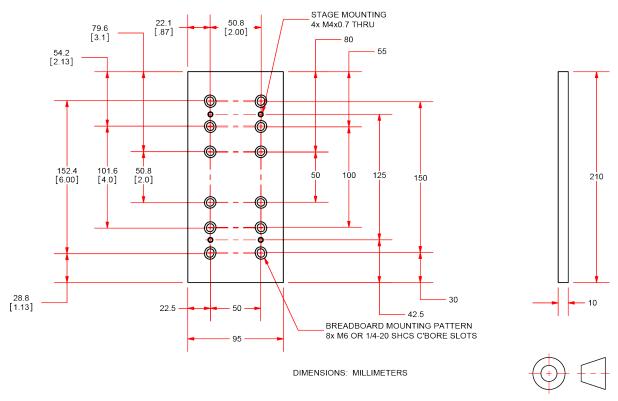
ANT95L-100 Mounting Plate (-MP) Dimensions
